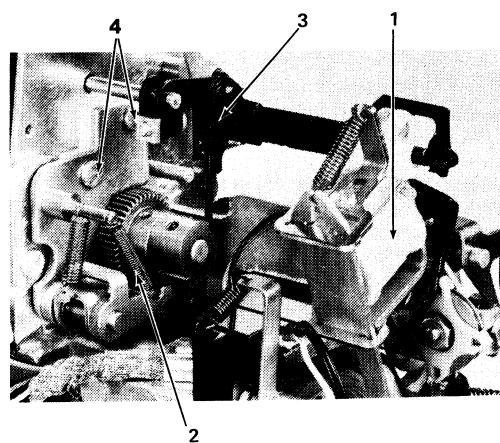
Filter Shaft Removal (Printer Tilted Up)
